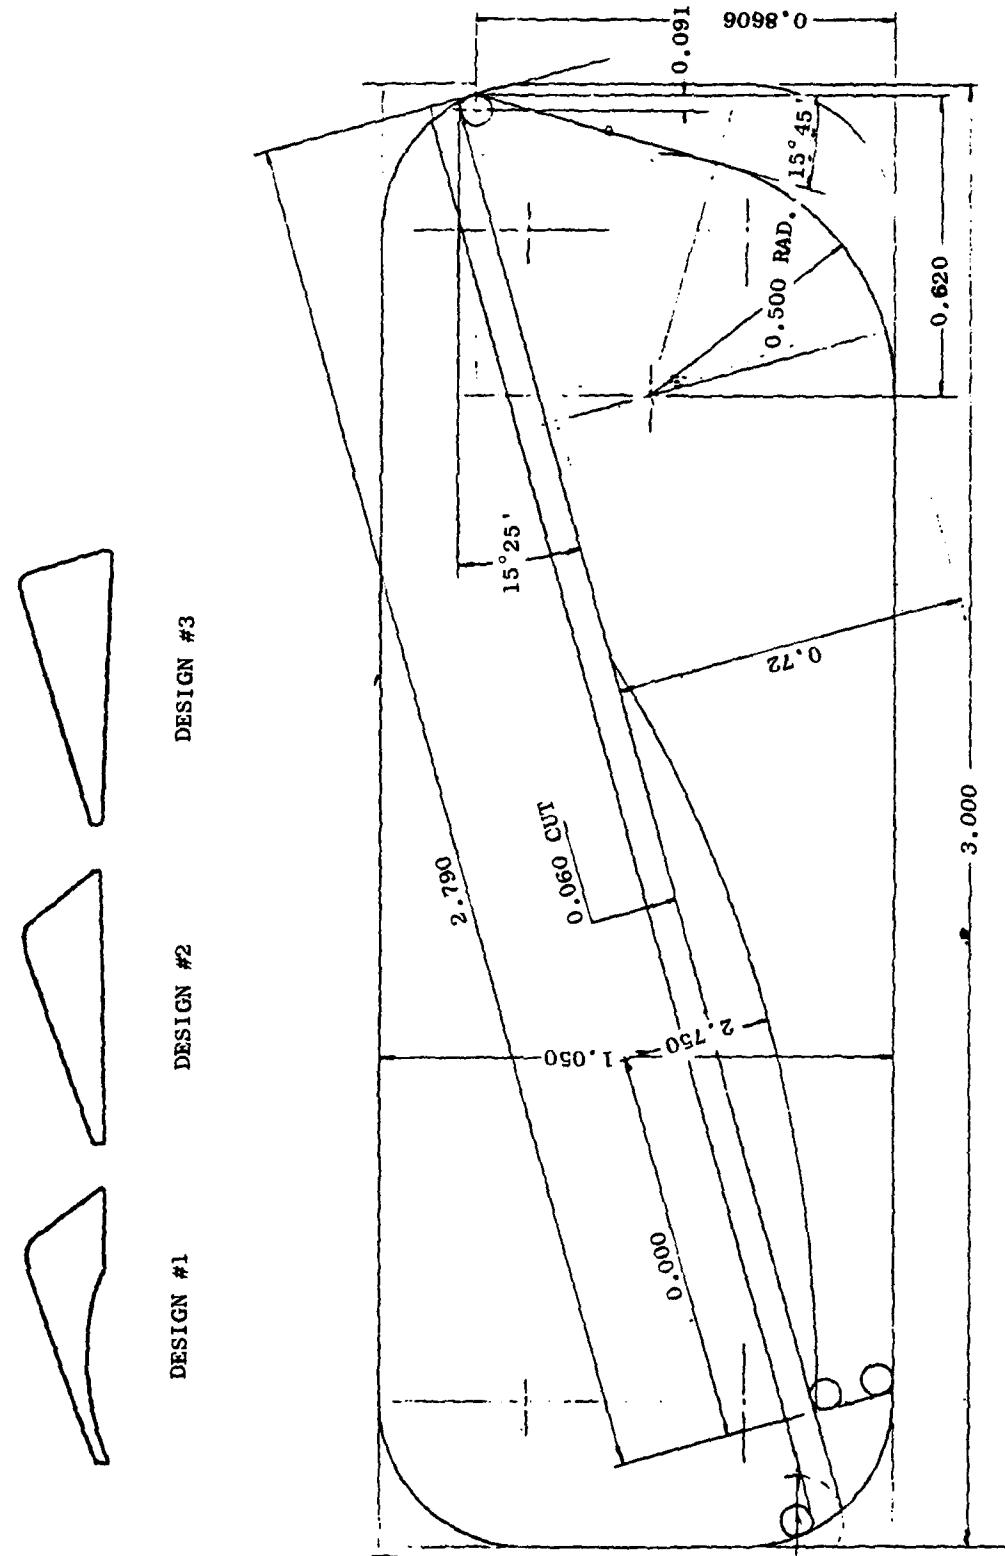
Preform Designs for HPT Vane Phase II Forging Campaign
